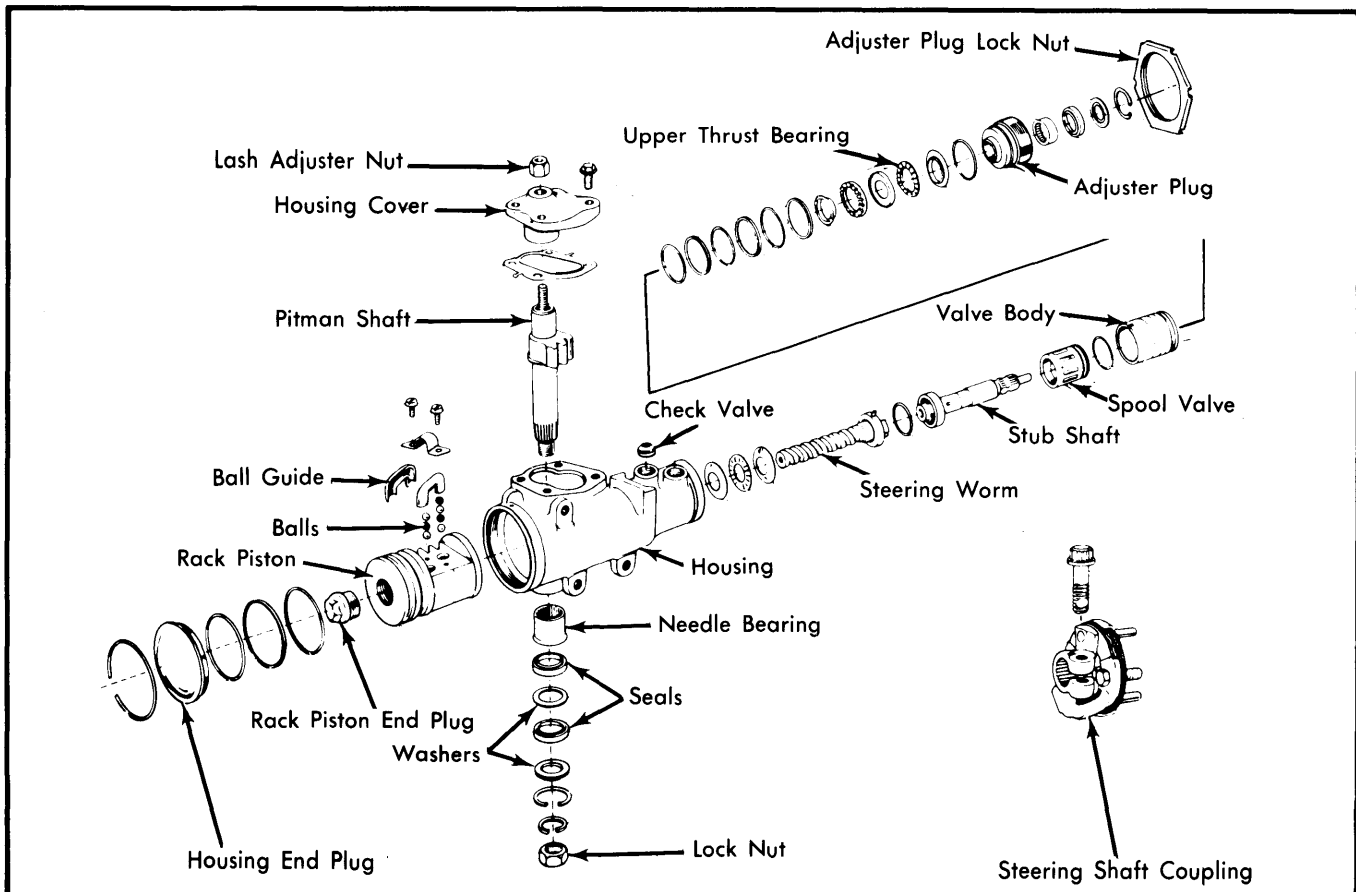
Exploded View of Saginaw Rotary Valve Power Steering Gear
